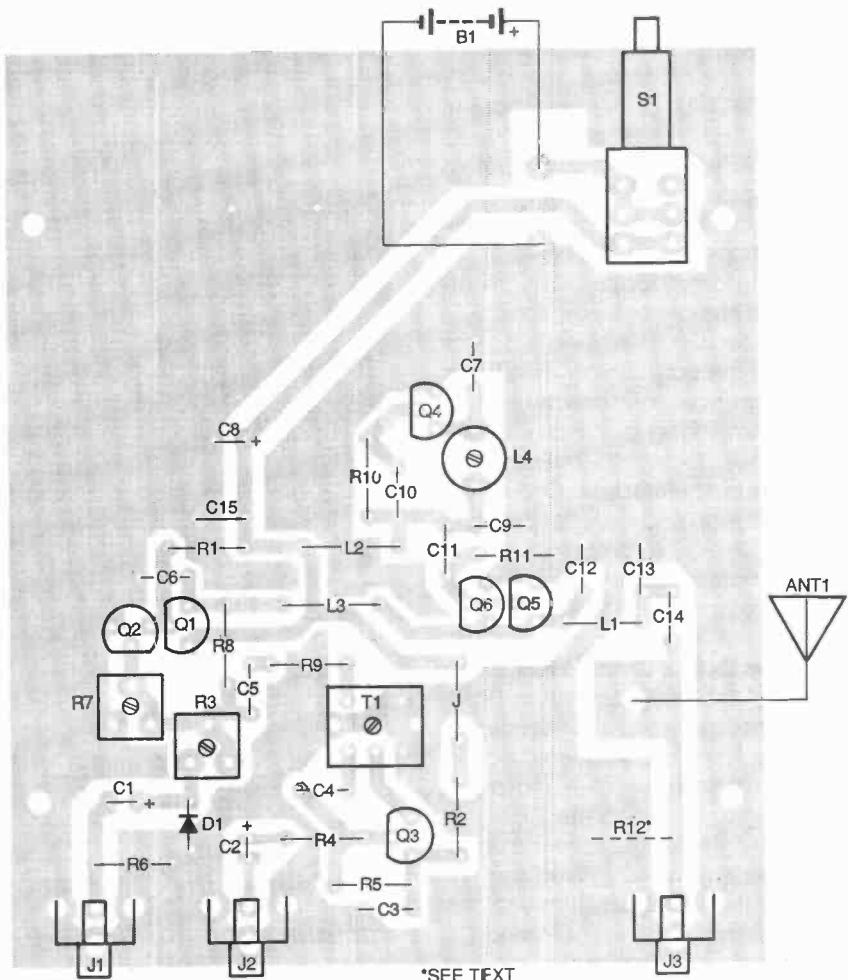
Building the project is easy if you use this parts-placement diagram. Resistor R12 must be tack soldered on the solder side of the board between the antenna output and ground.
